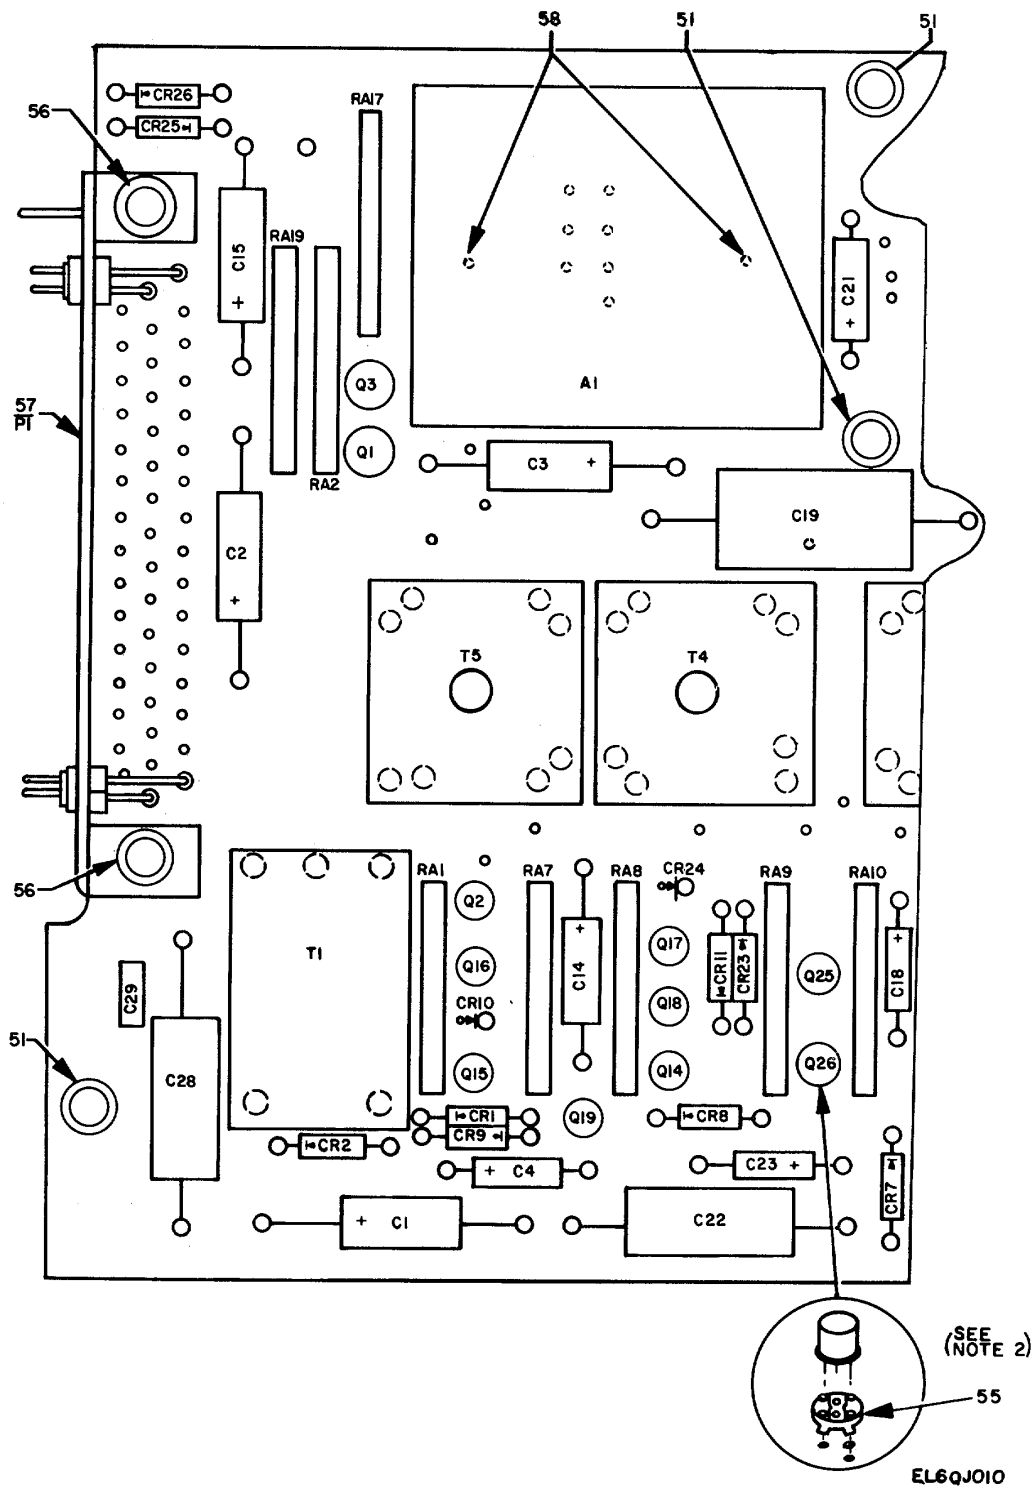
Printed Circuit Card Assembly (Sheet 1 of 3)
